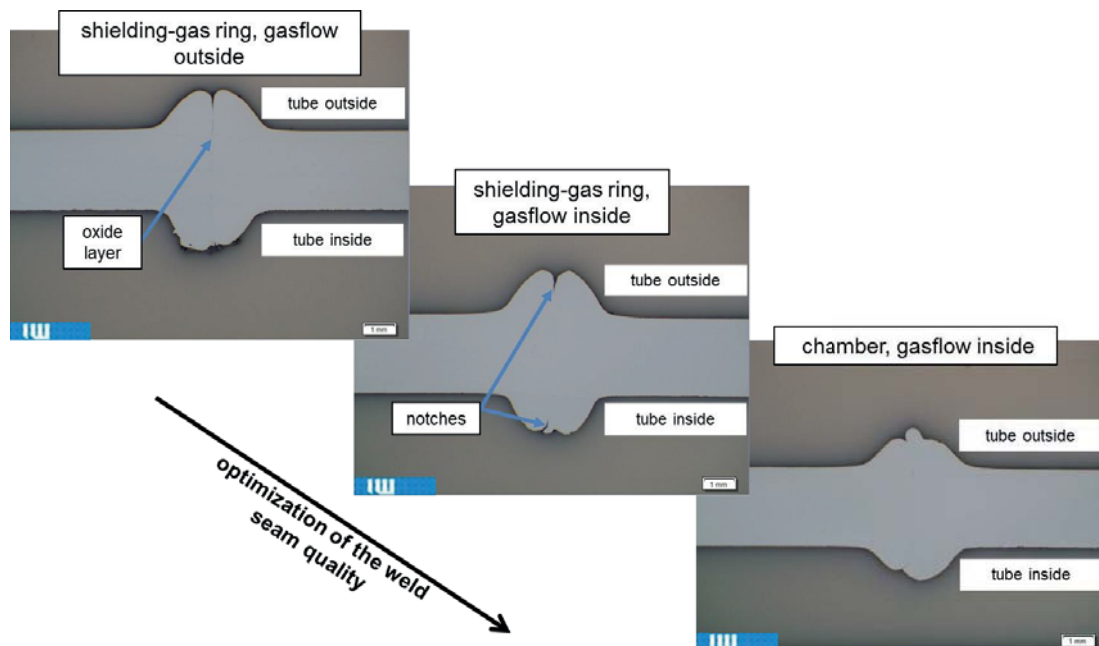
Makrosection image of the weld seams, unetched, material J55
